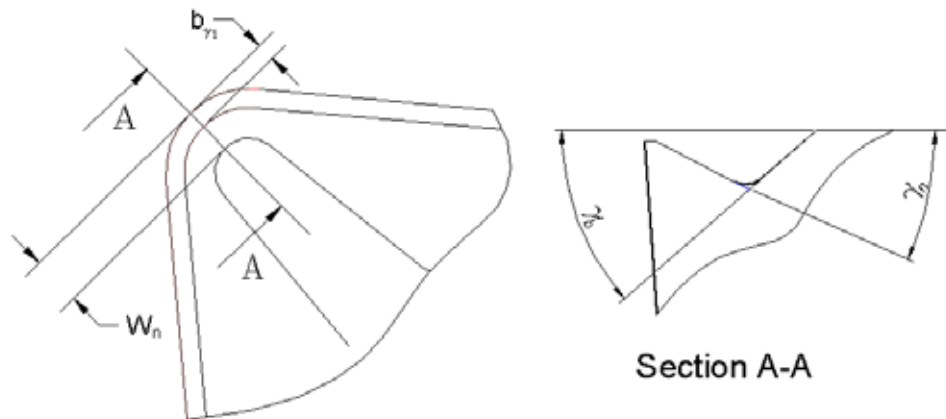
Groove Dimensions in Protruded Groove Type Inserts
